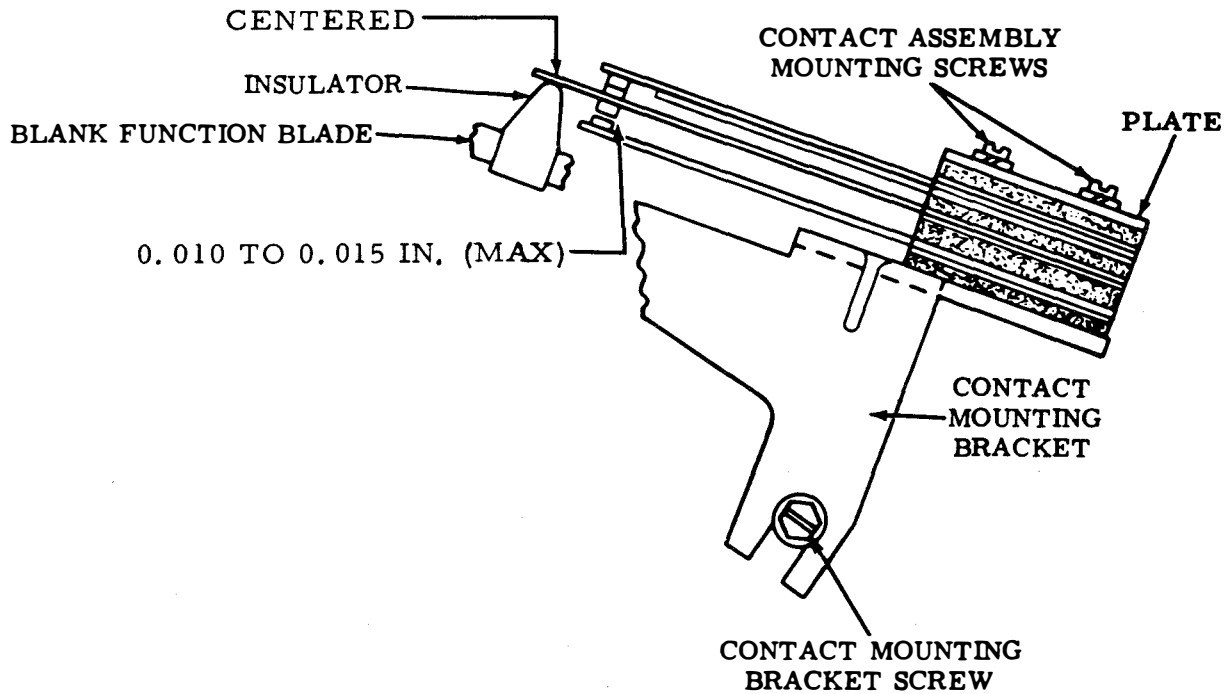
Contact Assembly and Contact Gap - Right Side View
